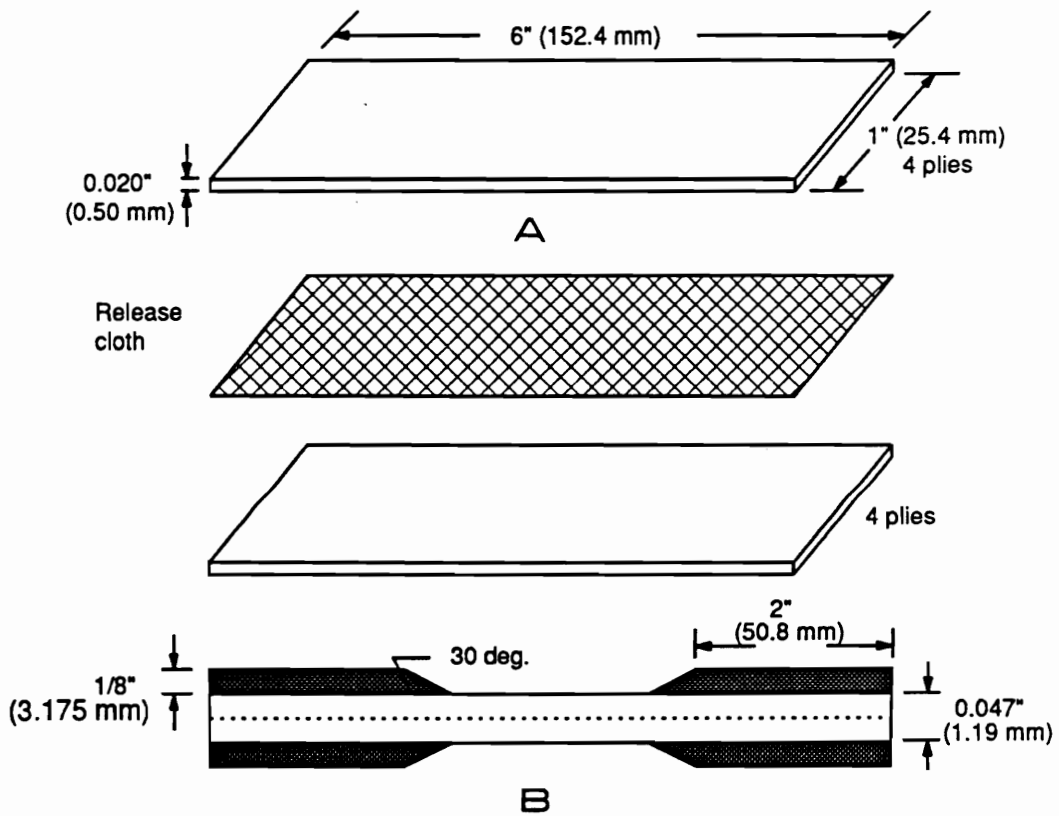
Test specimen dimensions in inches (mm.): (A) Laminate assembly, (B) Test specimen with bonded tabs. (Load applied horizontally)
